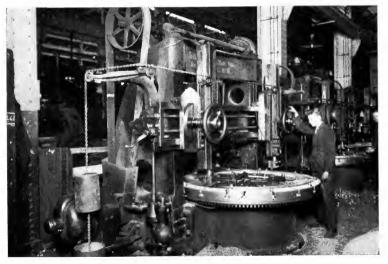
MACHINIST APPRENTICES OPERATING LARGE BORING MILLS SCHENECTADY WORKS
